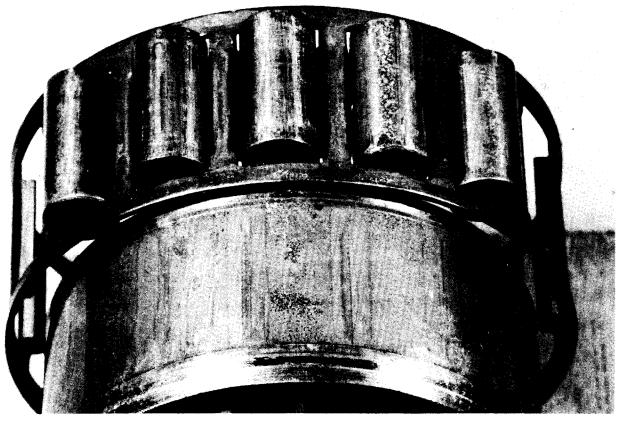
Bearing failure, corrosion and wear, due to moisture in housing.
